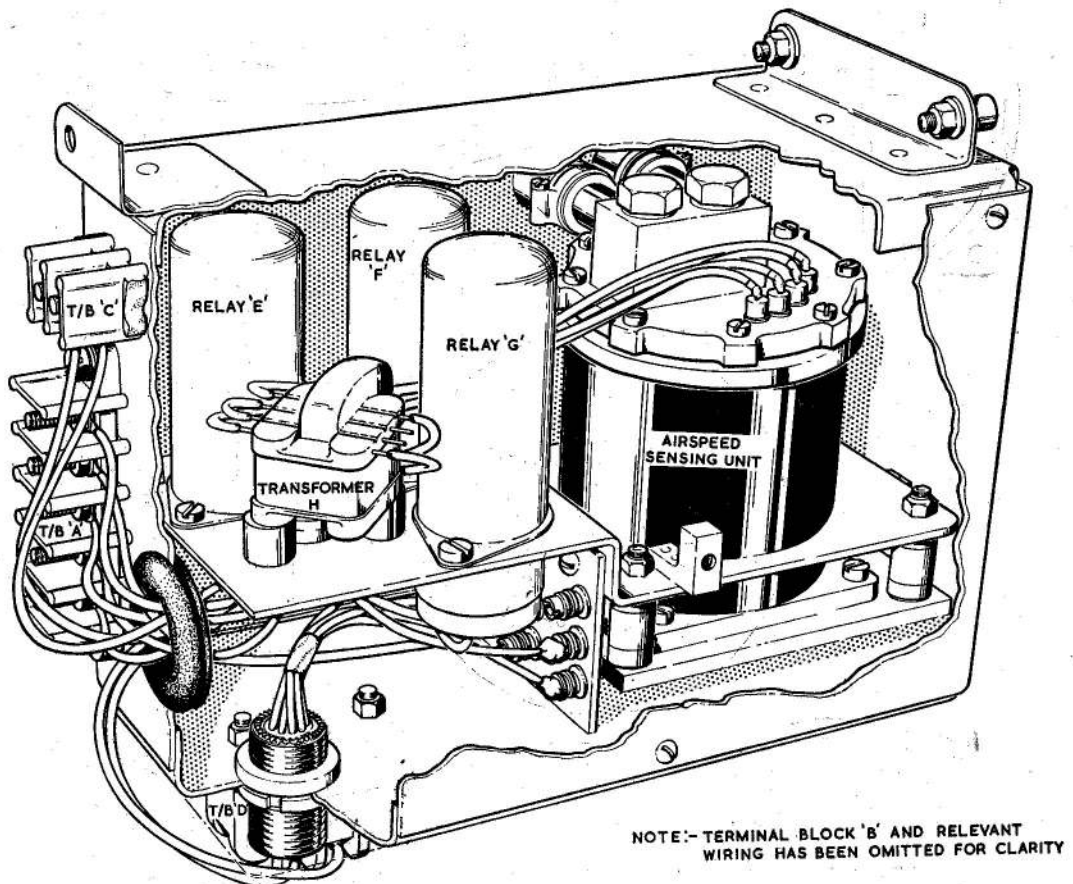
Air speed datum and relay box — cutaway view
